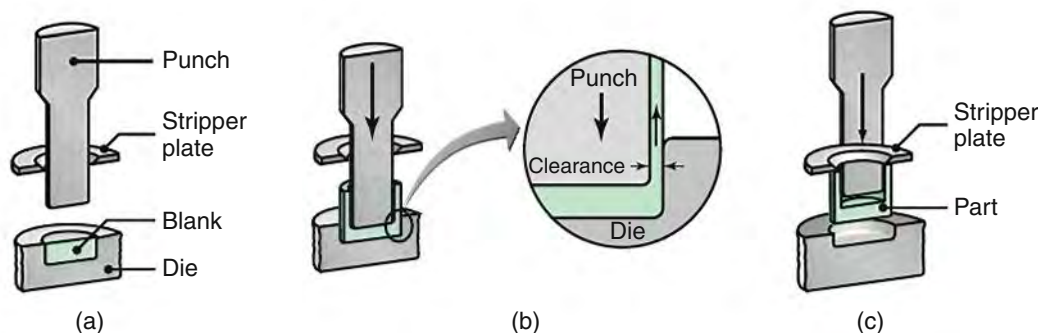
Schematic illustration of the impact-extrusion process. The extruded parts are stripped by the use of a stripper plate, because they tend to stick to the punch.
